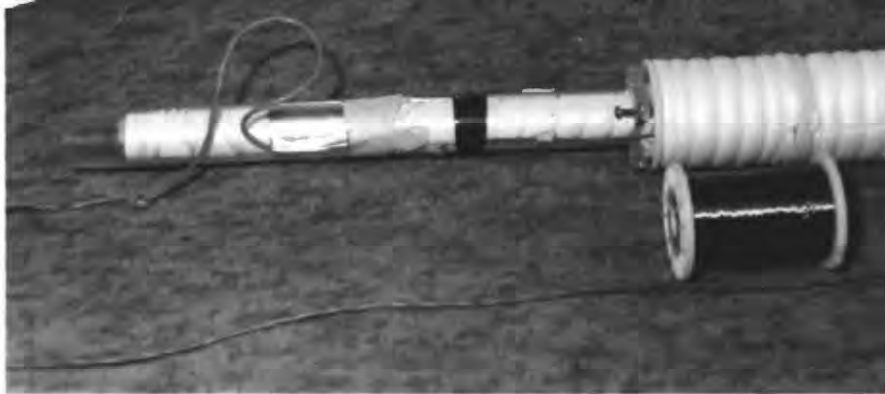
High density foam installed on the spools to protect wire and secure winding-core assembly into outer housing.
